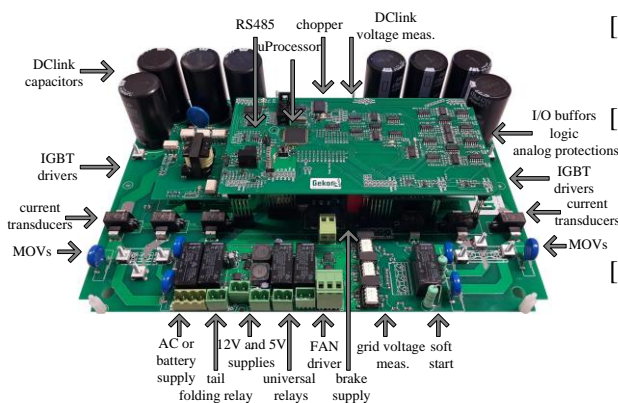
View of control board (on the top), driver boards (middle) and power board (the largest, on the bottom)
